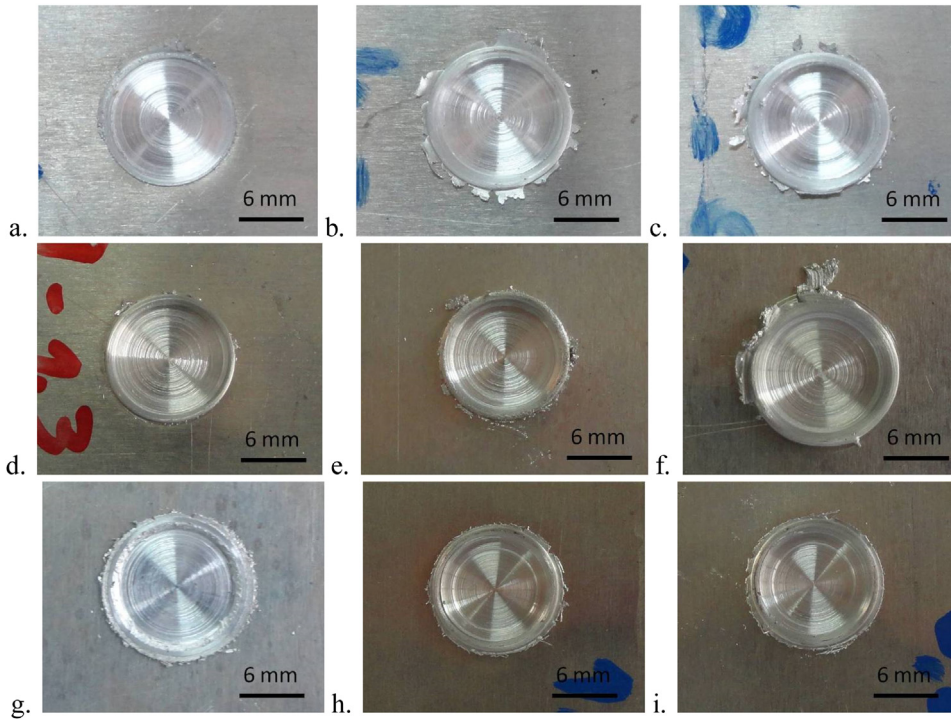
Welds surface appearance: (a) 5-A, (b) 25-A, (c) 55-A, (d) 5-B, (e) 35-B, (f) 55-B, (g) 5-C, (h) 40-C and (i) 65-C.
